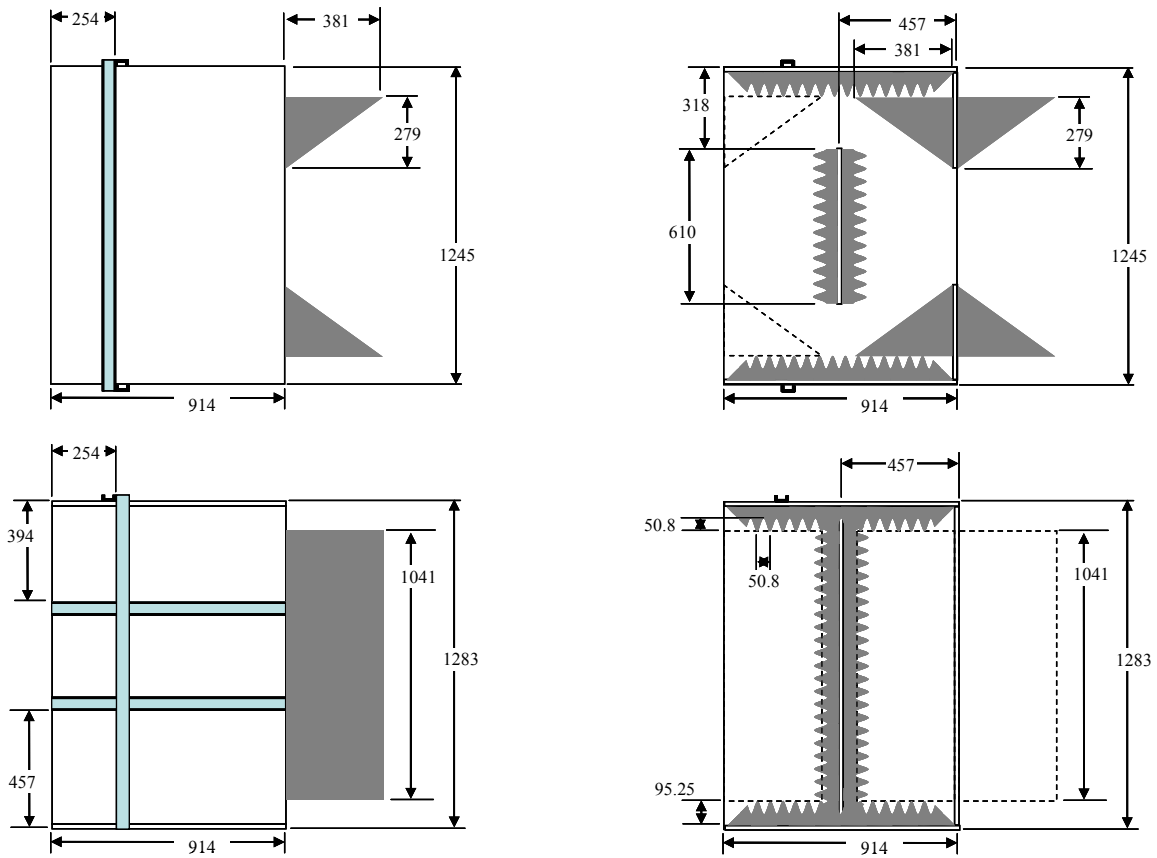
through Figure 3-7 show drawings of the final configuration of each of the settling chamber components. Each component is shown in four views; top external, side external, top internal, and side internal. The external view shows configuration of the MDF sheets, shown in white, and the steel reinforcement, shown in light blue. The internal views show the layout of the acoustic treatment and nozzle components along the settling chamber. Foam was attached to all the internal surfaces of the settling chamber. For clarity only foam which appears in the figures in profile is shown in gray. Foam on surfaces which are parallel to the view is not shown. The nozzle components are shown in pink and the flow inlet is shown in green.
